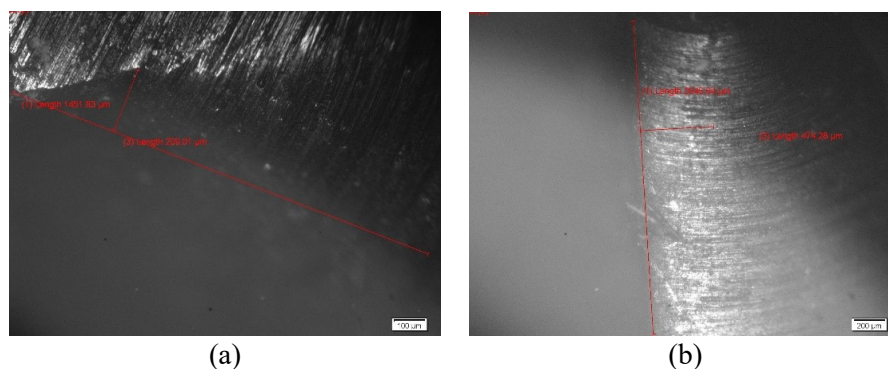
Tool wear after drilling process with 3000 rpm spindle speed (a) after drilling 10 holes (b) 20 holes.
